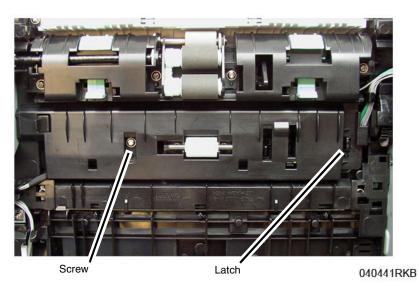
Feed and Reg Sensors PWB Cover (Bottom View)
